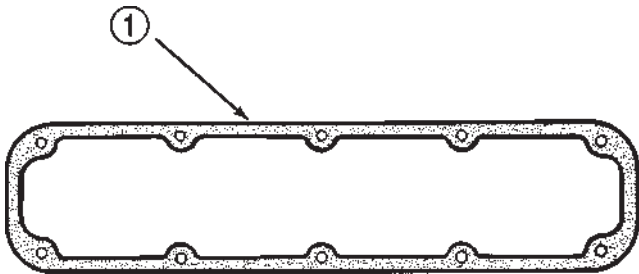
Cylinder Head Cover Gasket V-8 Gas Engines
